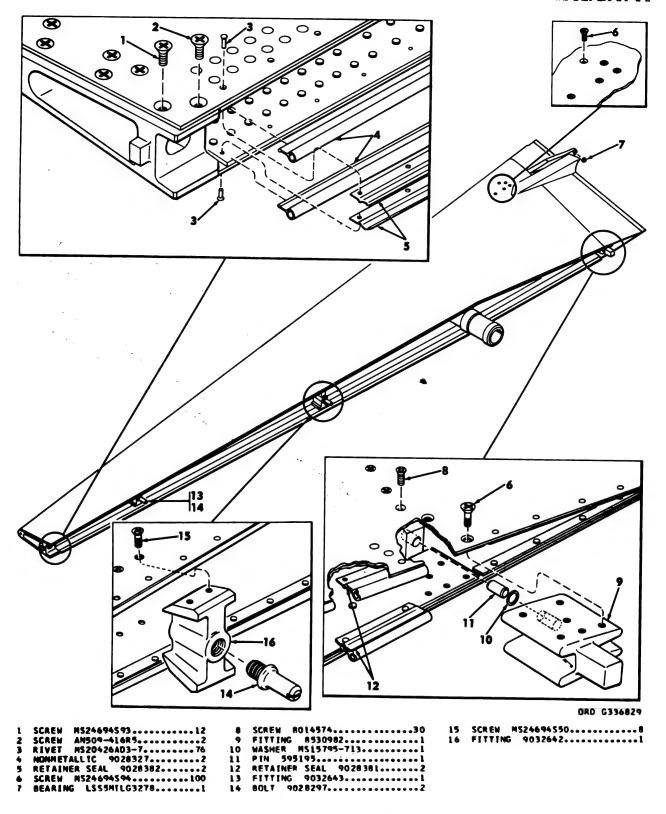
FIN, STRUCTURF ASSEMBLY /9028313/ /SEE FIGURE 20 FOR NEXT HIGHER ASSEMBLY/
